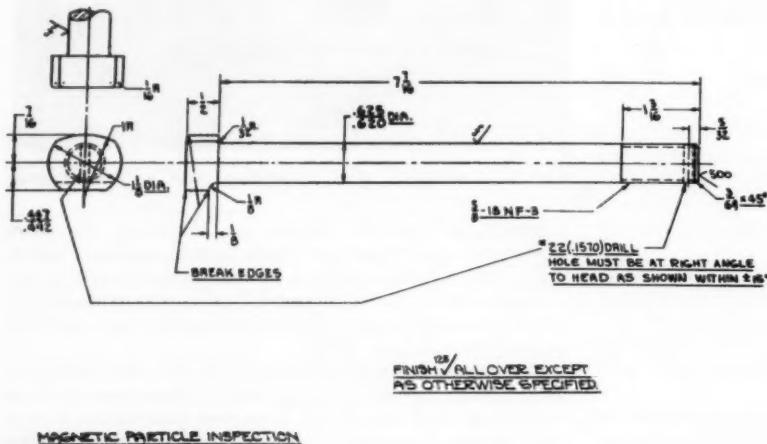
Connecting-rod bolt with a specified finish of 125 microinches all over
